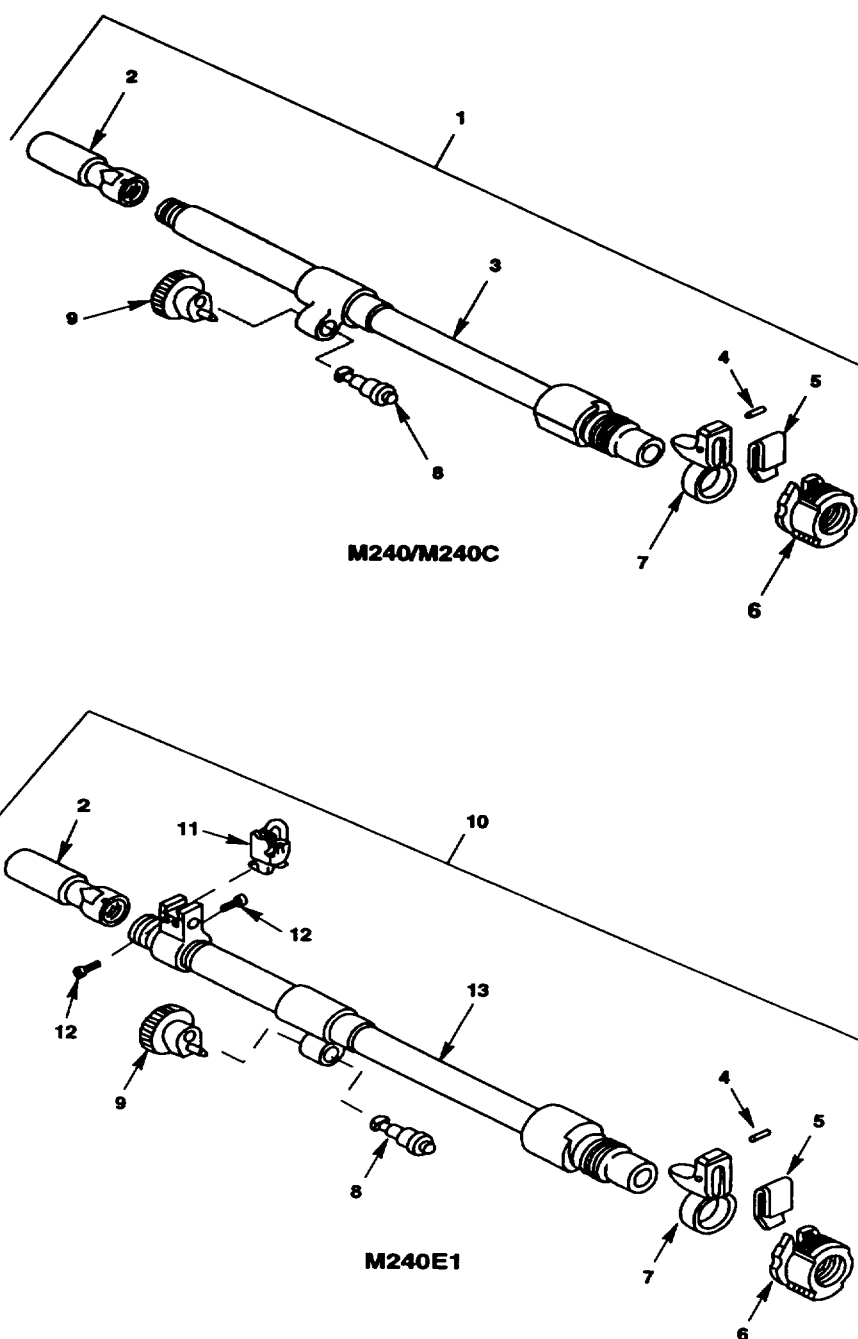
Barrel Assembly, M240/M240C, PN 11825985;
